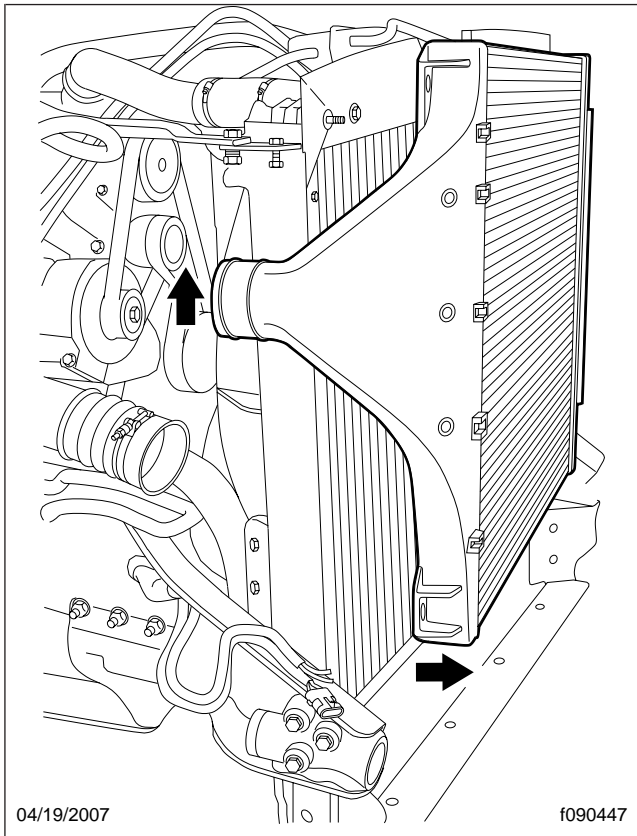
, 47-Tube CAC Tilted for Removal, Side View
